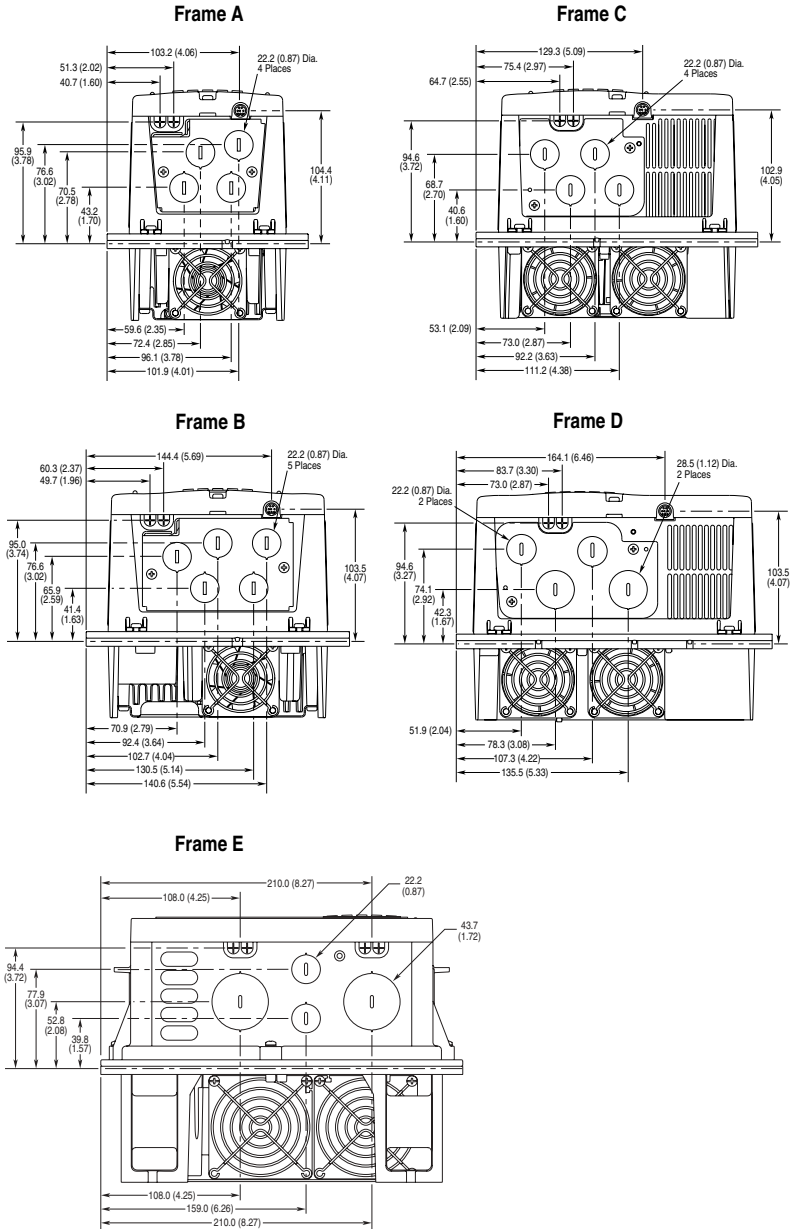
PowerFlex 70 IP 54 / IP 66 (NEMA/UL Type 4X/12) Bottom View Dimensions
